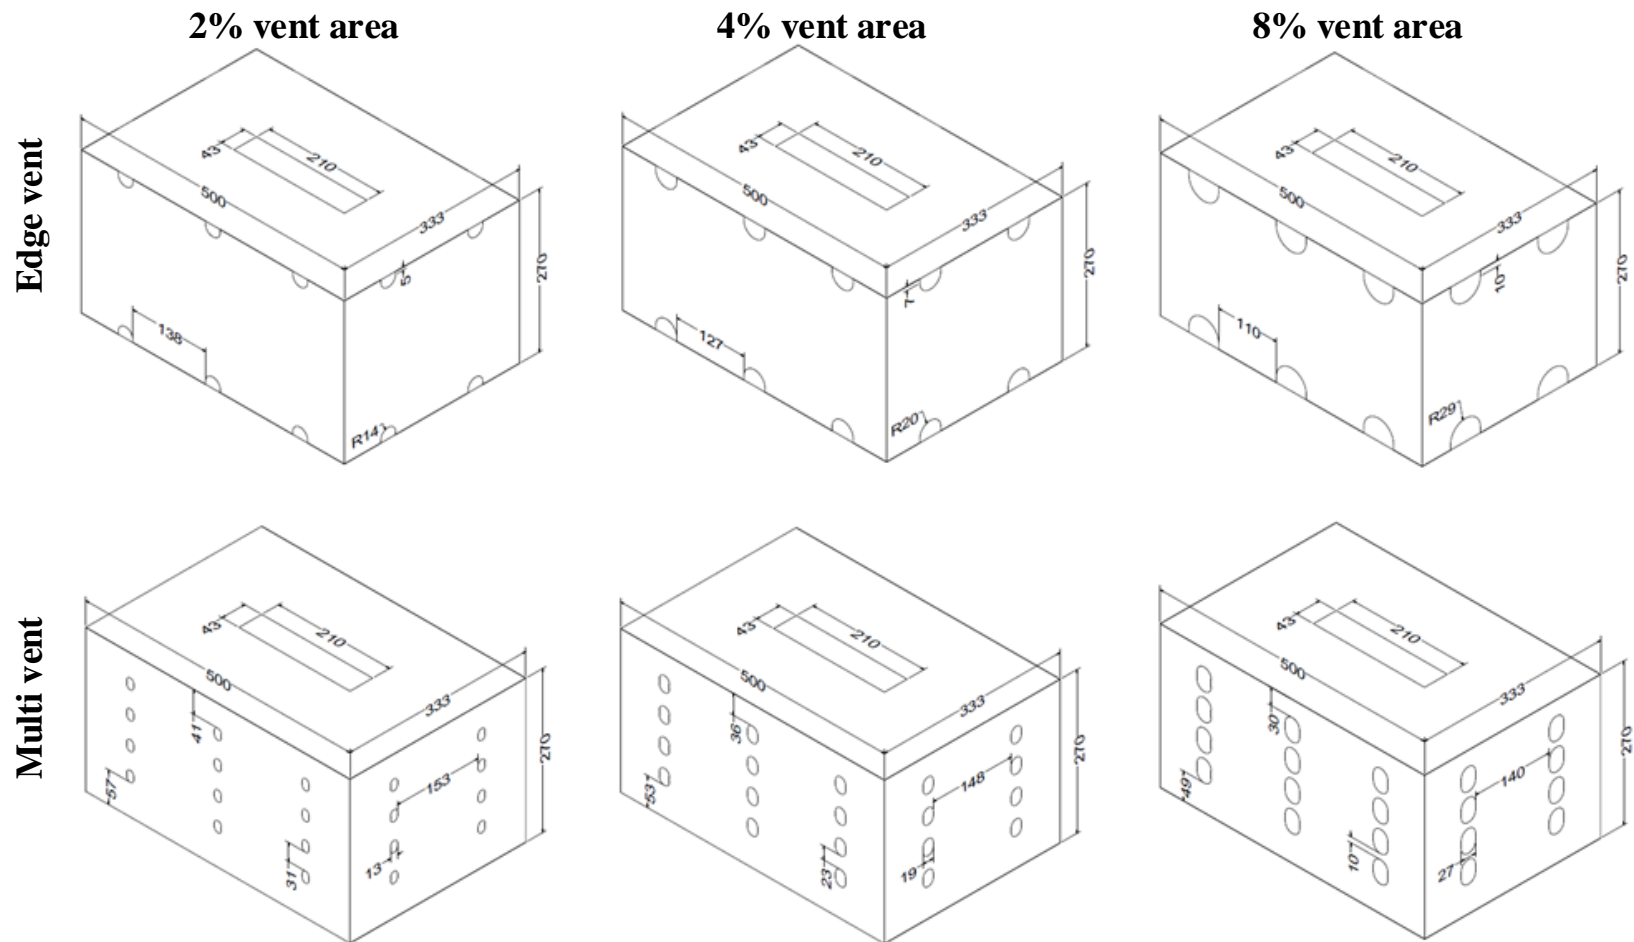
Geometry and dimension (in mm) of the corrugated paperboard packages (Continued).
